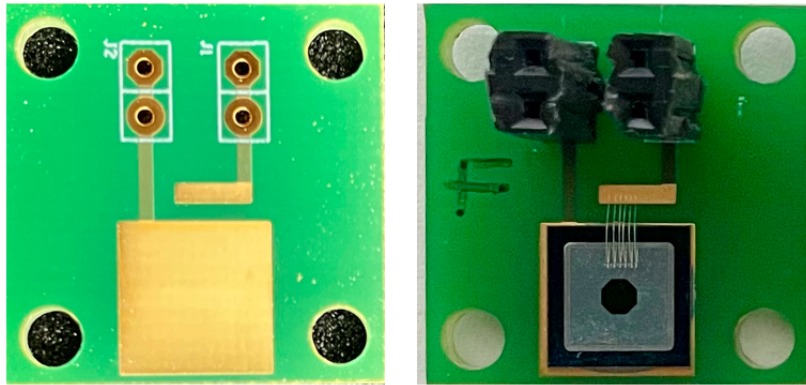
On the left, the PCB displays pads for back side contacting and bonding wires, while on the right, the PCB features a diode glued, bonded, and soldered with contacts.
